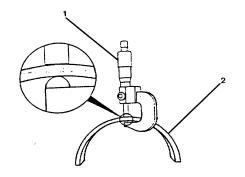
<u>Bearing Shell (Sleeve)</u> <u>Measurement.</u>
